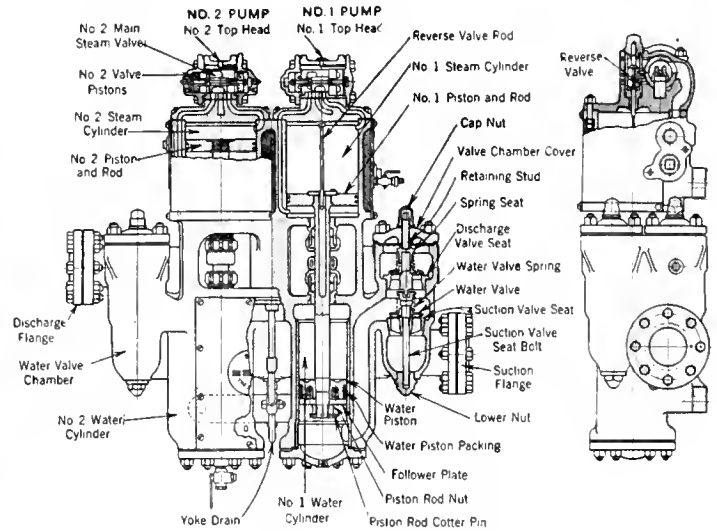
Details of Two-Cylinder Elesco Pump
